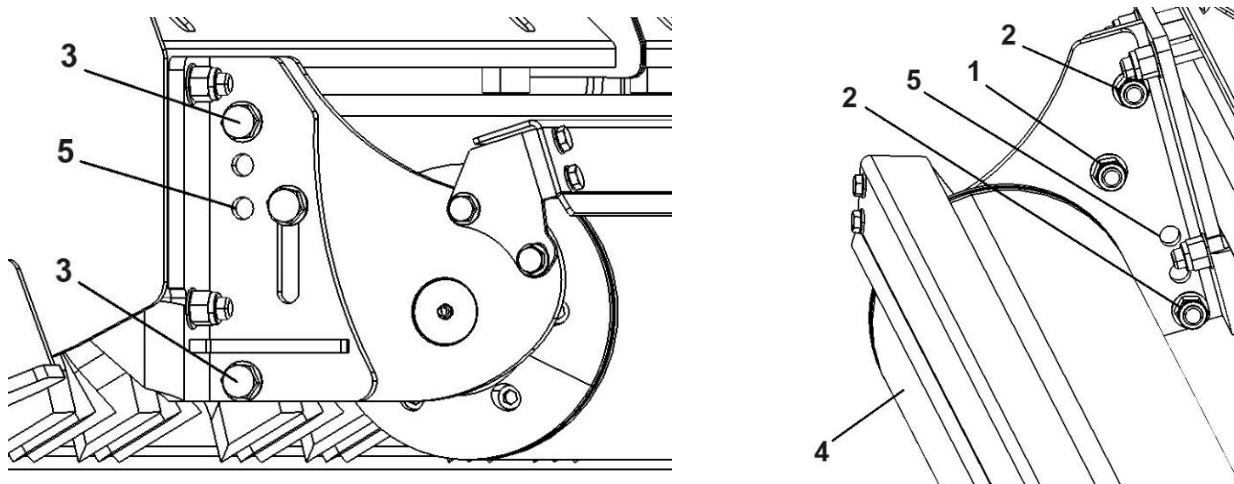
Adjusting the position of the following roller: 1 – nut, 2 – nut, 3 – bolt, 4 – following roller, 5 – adjustment holes
